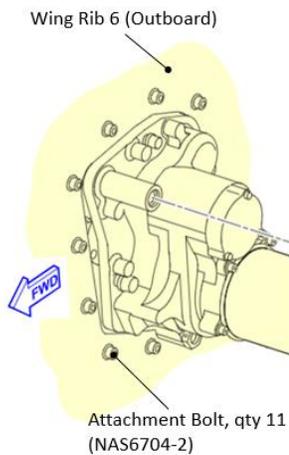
LHS Fuel Boost Pump Canister to Wing Rib 6 attachment bolts (looking inboard)
